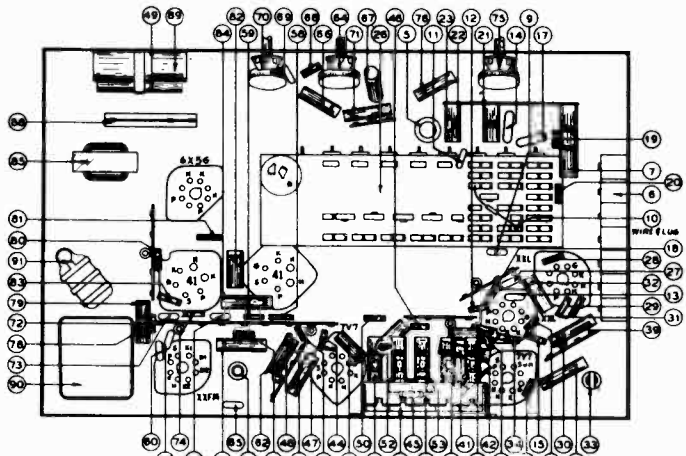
PART LOCATIONS, UNDERSIDE OF CHASSIS
